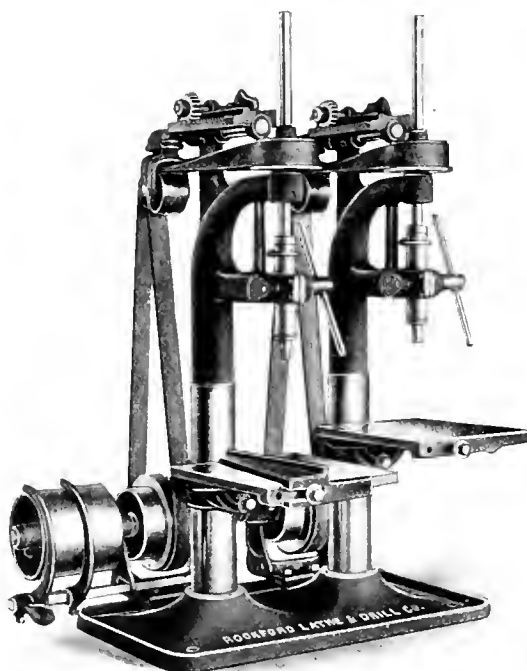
Two-spindle Bench Drill with Self-contained Countershaft
